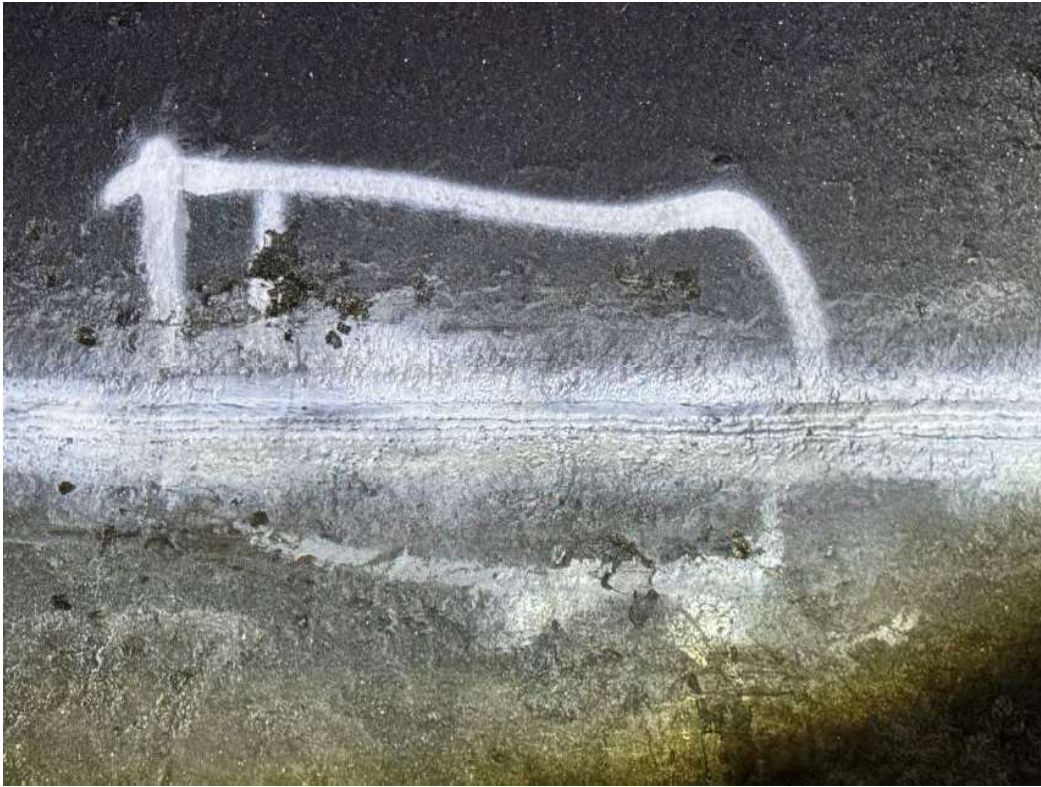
Close-up of intermittent weld indication at Can 79S
